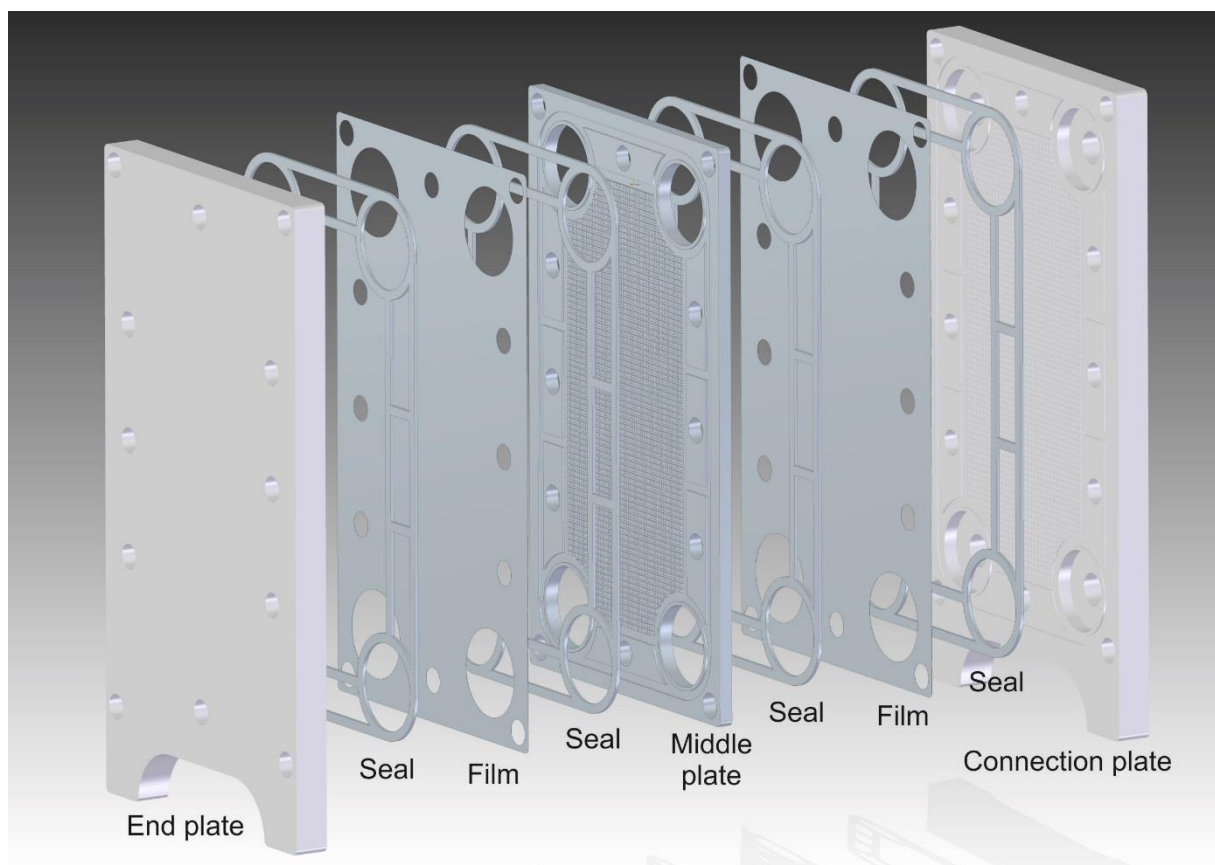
The CAD sketch of the full-scale heat exchanger with four fluid chambers
